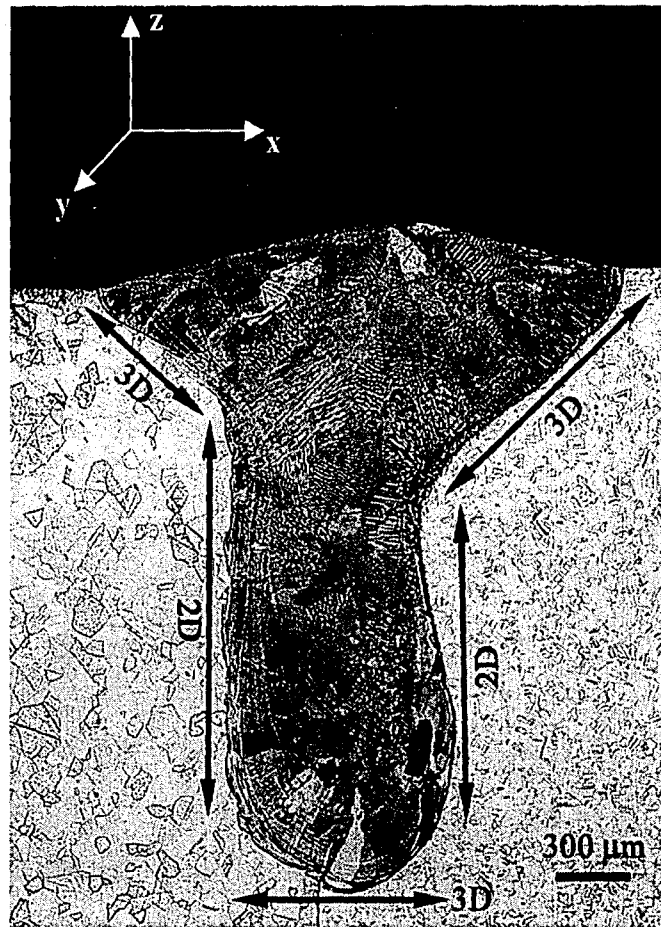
Typical dissimilar metal laser weld with Ni200 base metal on the left. The weld pool shape is a combination of 3D and 2D heat flow conditions. Y direction is out of the page.
